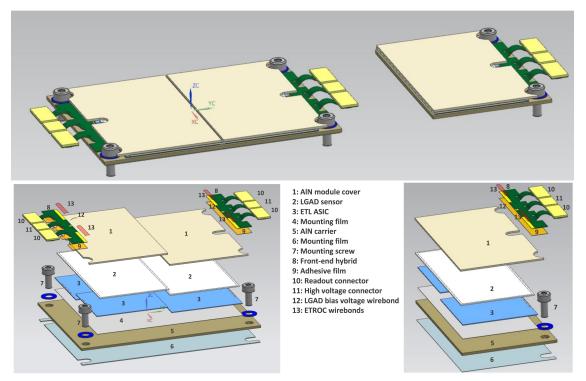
The two-sensor and one-sensor modules. Shown are views of the assembled modules (top), and the details of the module parts (bottom).
